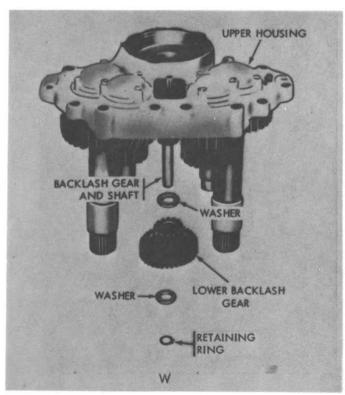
Traversing gearbox disassembly or assembly (8 of 15).
